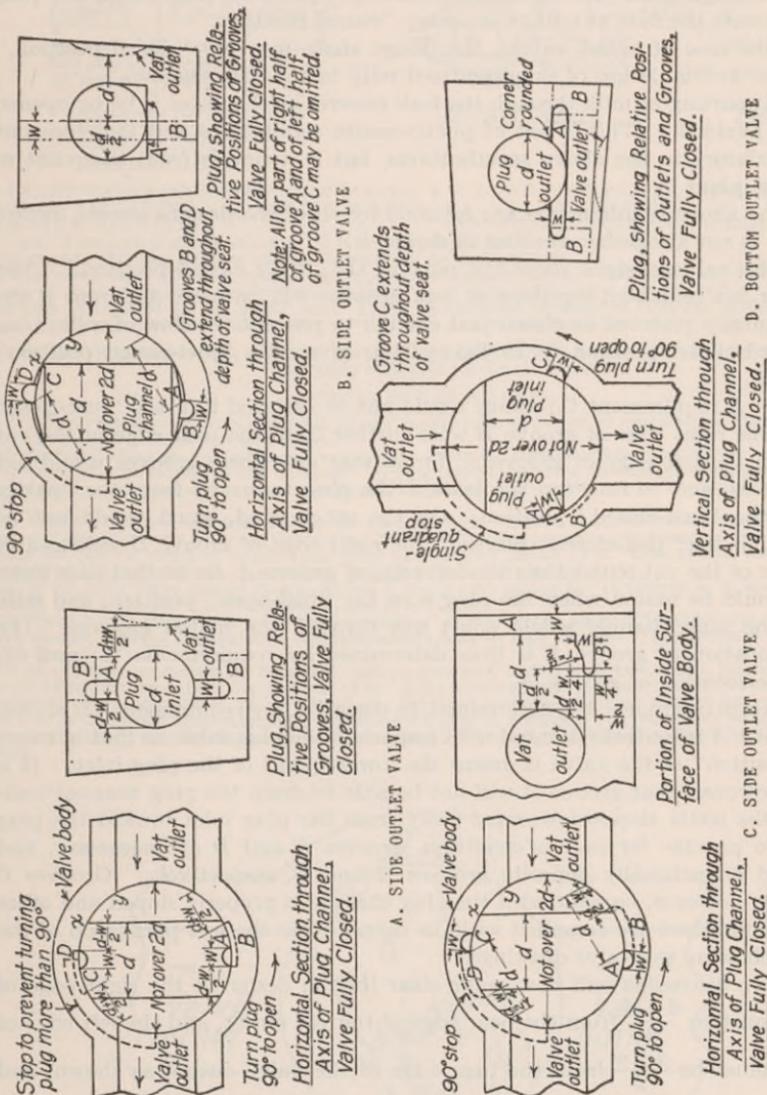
Suggested designs of gravity-flow plug-type leak-protector pasteurizer valves and connections conforming with Item 16p (c).
